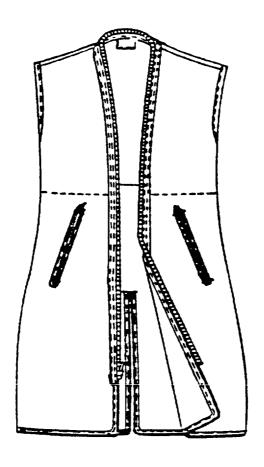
, OVERCOATS MEN'S, WITH REMOVABLE LINER
